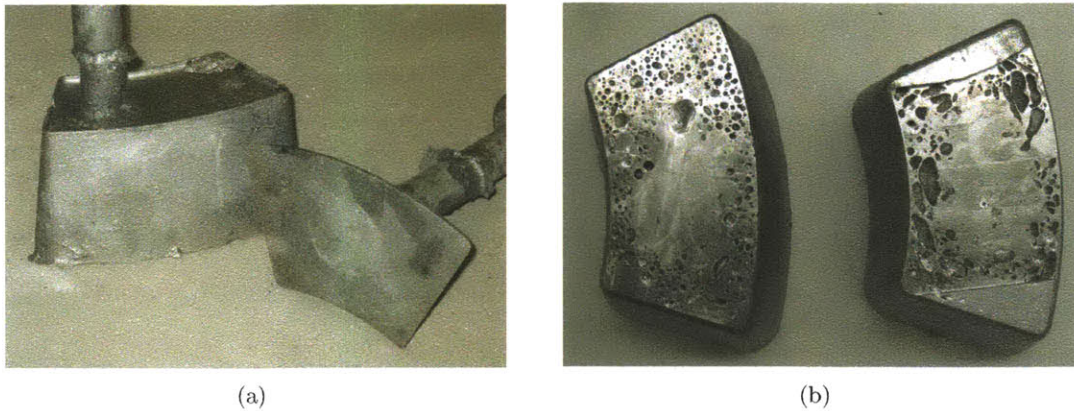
(a) A completed aluminum water vessel and bottom clamping plate using the 3D printed part method. (b) Surface finish after machining the exterior layer of each cast. In the left version, a de-gassing tablet was used to remove hydrogen from the molten metal. On the right, no de-gassing was attempted.
